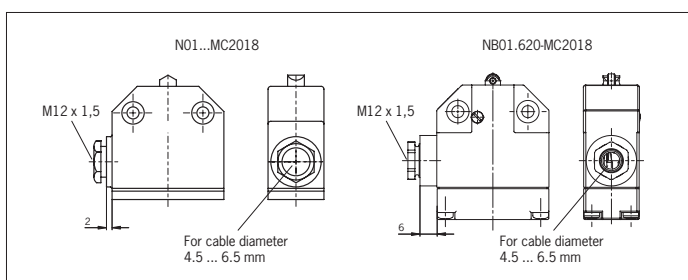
Dimension drawing NO1...MC2018/NB01.620-MC2018 with special cable gland
